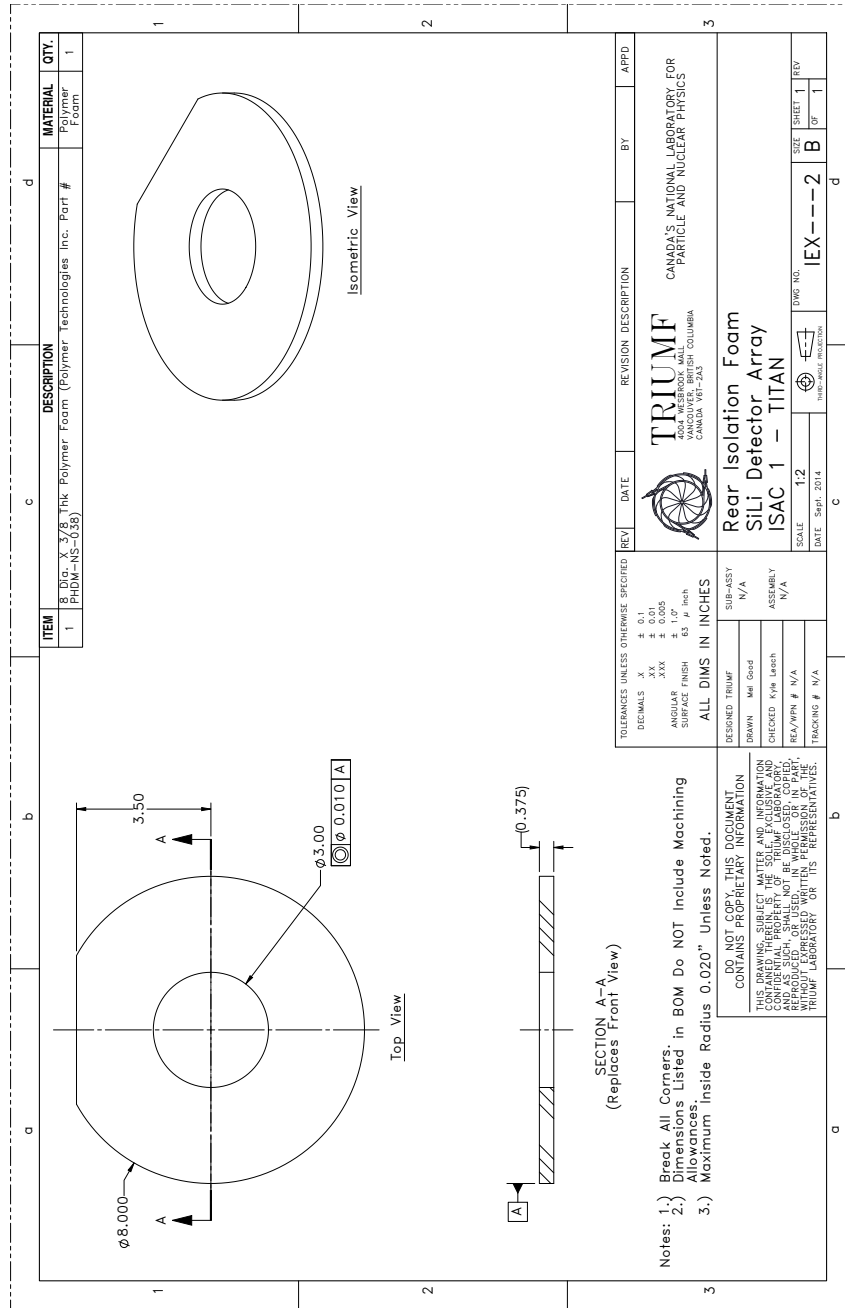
Technical drawing of the rear isolation foam parts [172].
